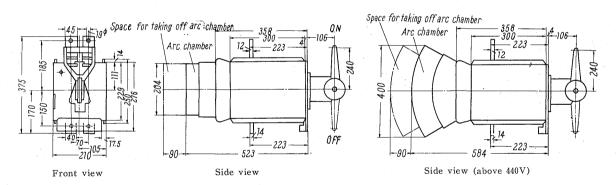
Outline drawing of air circuit breaker, type RF 914-1,000
